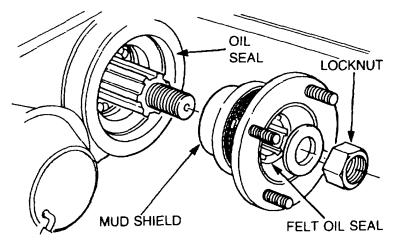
Output Shaft Cover Oil Seal Removal (Rear Axle)
